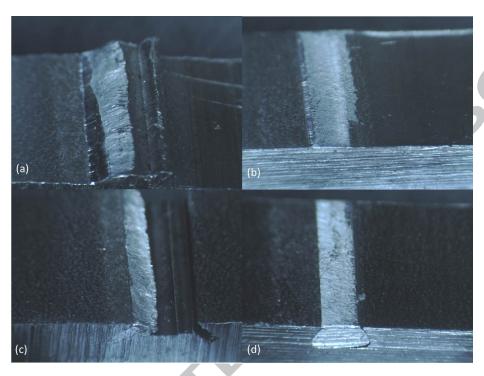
(a),(c) Fracture pattern of slit saw groove (b), (d) Fracture pattern of O-ring dovetail groove
